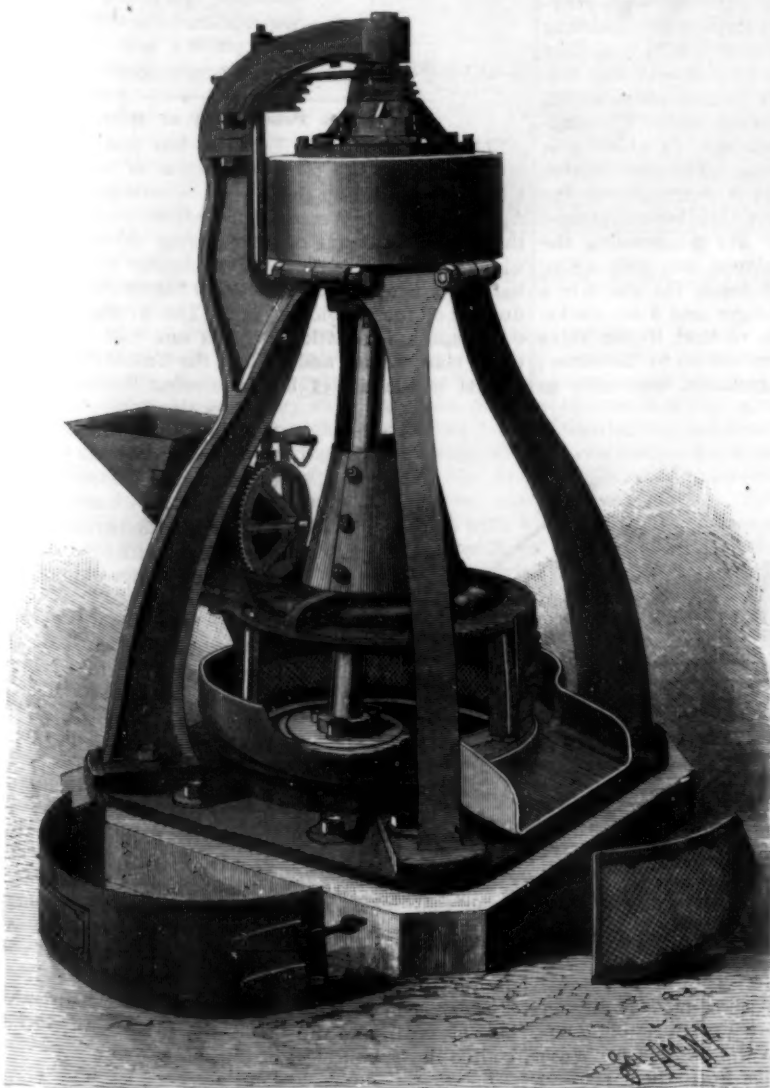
GRIFFIN ROLLER MILL FOR WET GRINDING.
